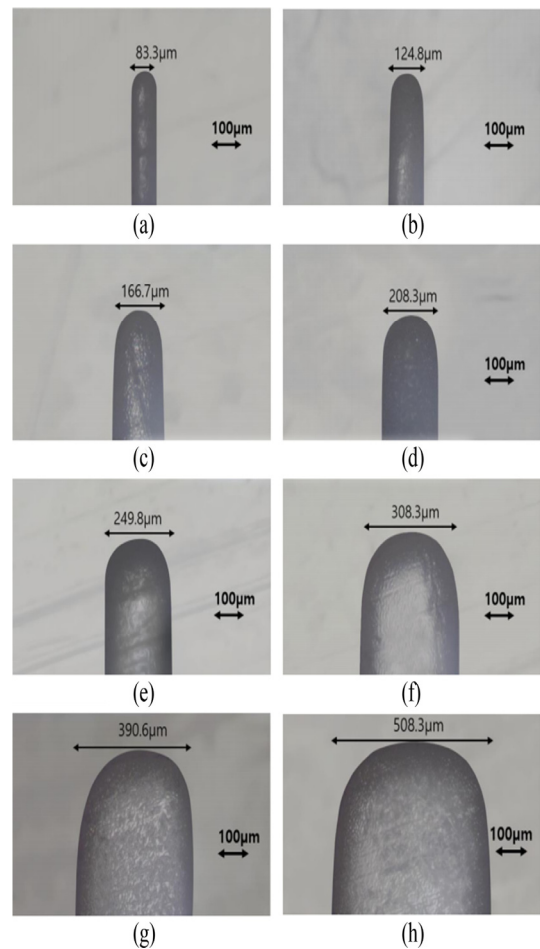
Cross-sectional micrographs of narrow width strips printed using the prototype 3D printer
